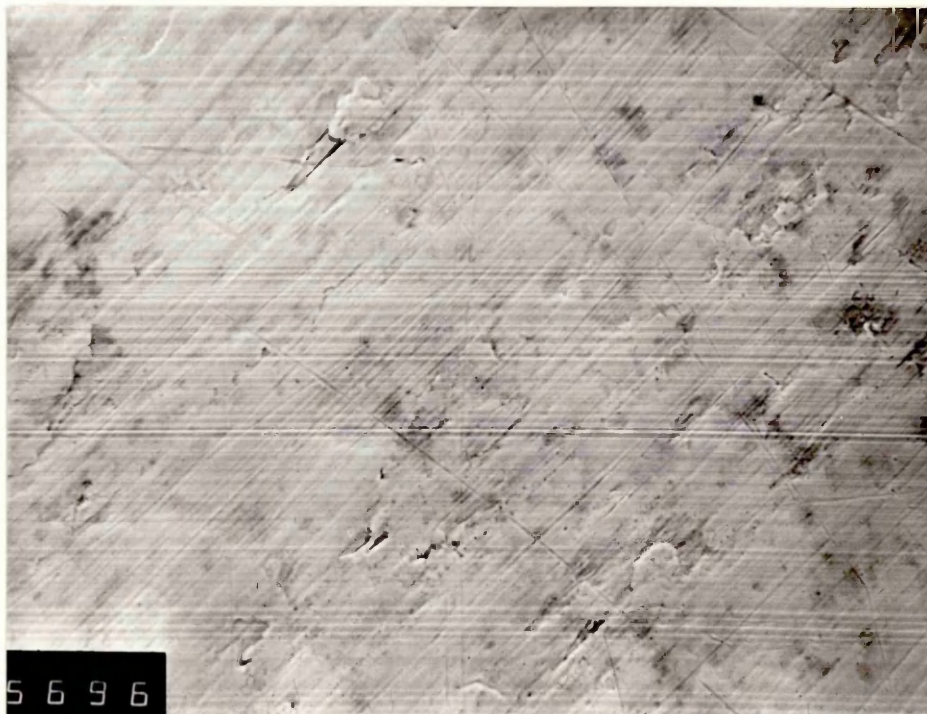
SURFACE FINISH OF COPPER WIRE DRAWN AT
